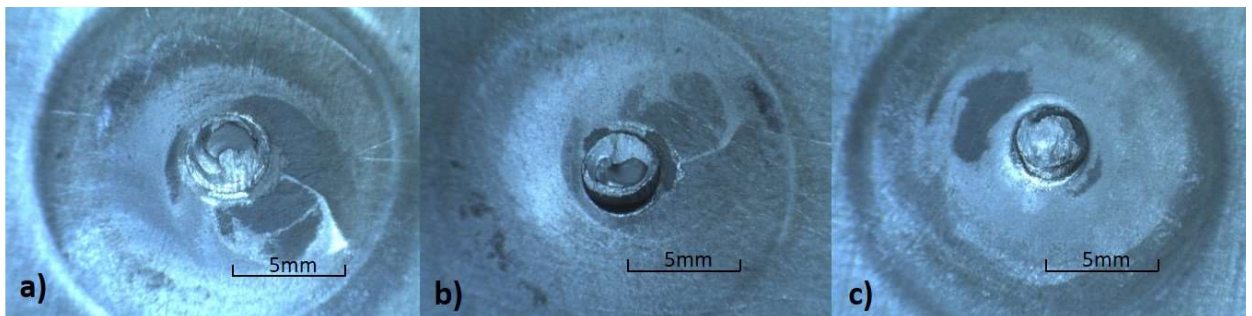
Failure Mode of samples. a) Rivet has been sheared off of the top aluminum plate. b) Steel sheet with deformed cylindrical puck of aluminum left behind. c) Rivet has been sheared off of the bottom plate.
